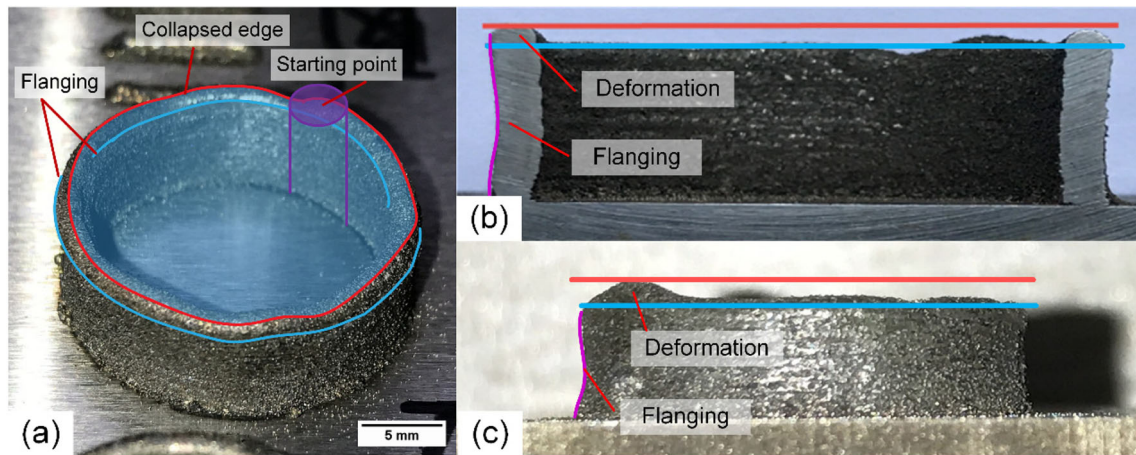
Defective thin-walled parts. a Isometric side view. b Sectional view. c Front view
